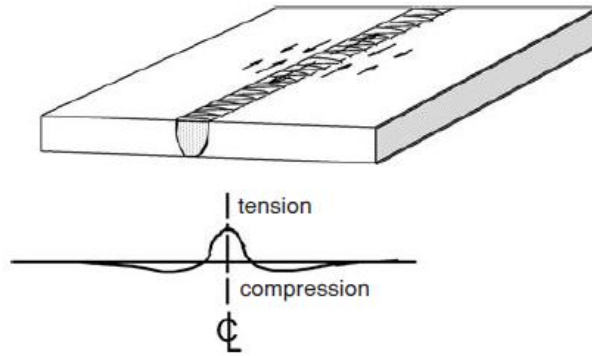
Typical residual stress pattern in a welded plate [22]
